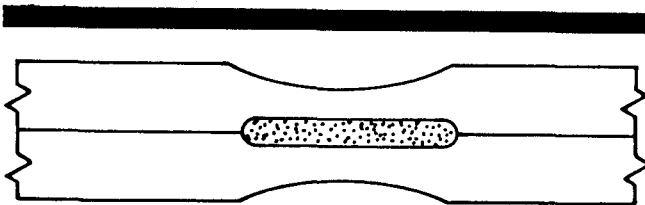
Surface Irregularity Produced by Spot Welding
